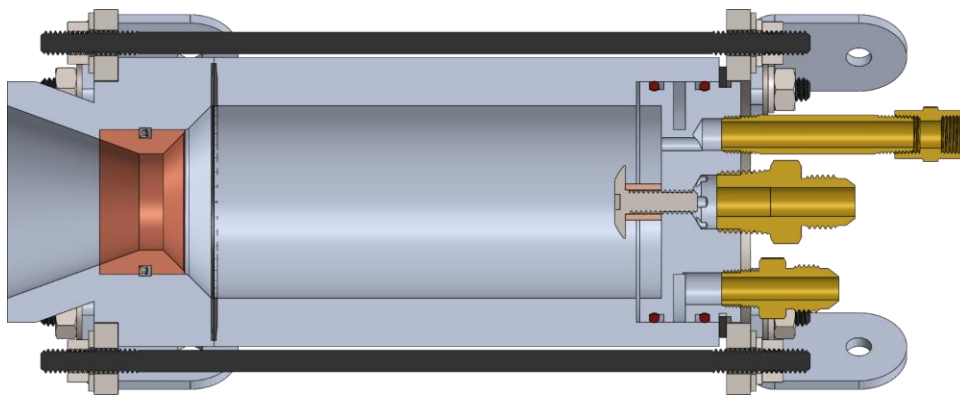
Standard thrust chamber assembly, with scribble injector and throat insert (cartridge igniter omitted)
